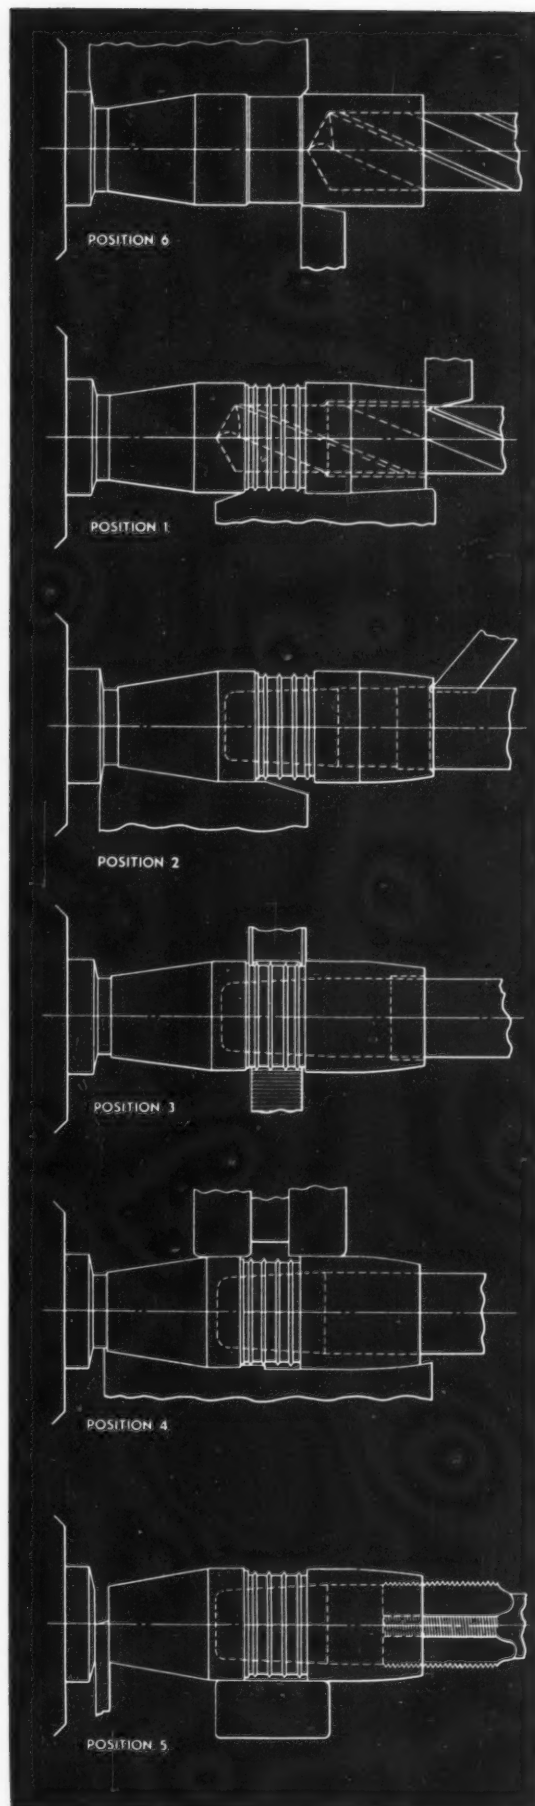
(Left) Tooling for Making the Nose of a 37-millimeter Armor-piercing Shell on an Eight-spindle Machine
